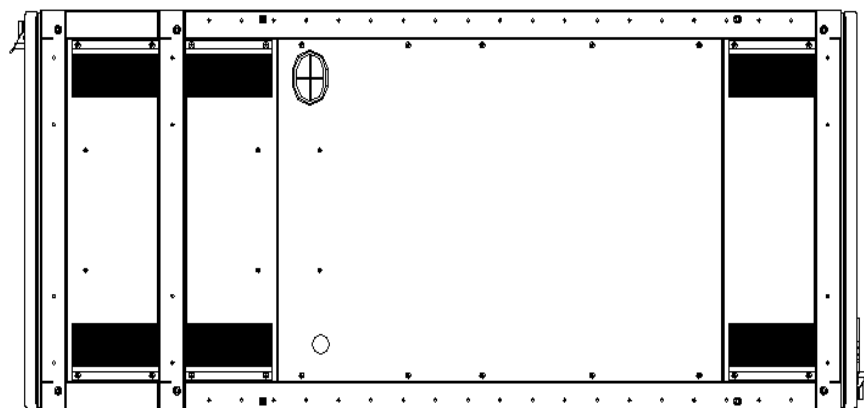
Foundation diagram of 1400mm, in mm)
